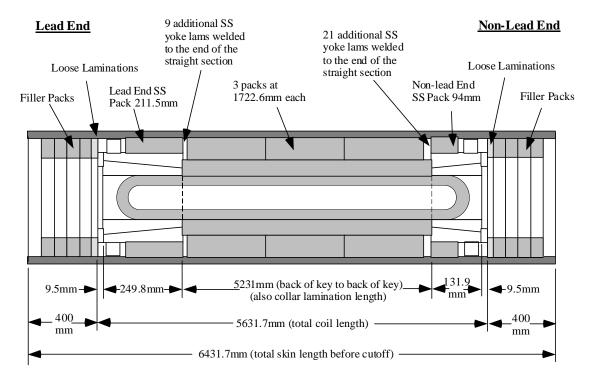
Yoke Assembly Configuration Before Welding
